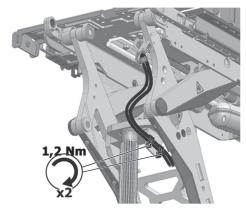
The bus cable is mounted in the two cable brackets on the lower part of the AP elevator's arm.
